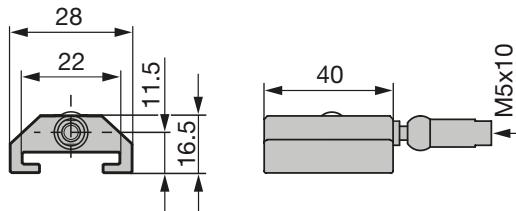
Installation dimensions of BTL5-T-2814-1S magnet
